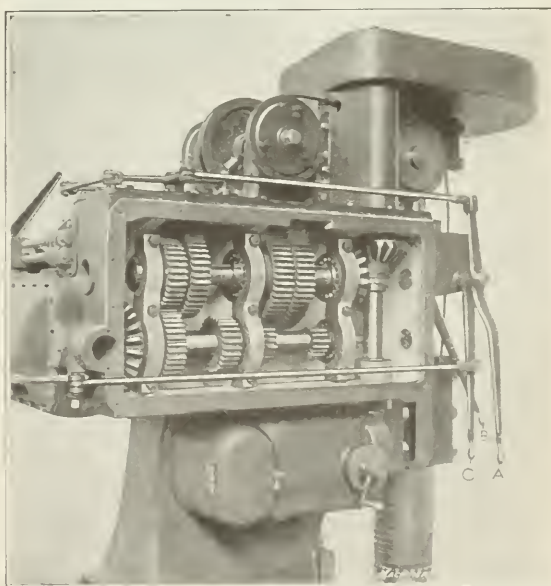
Close View of Speed-box with Cover removed to show Gearing
